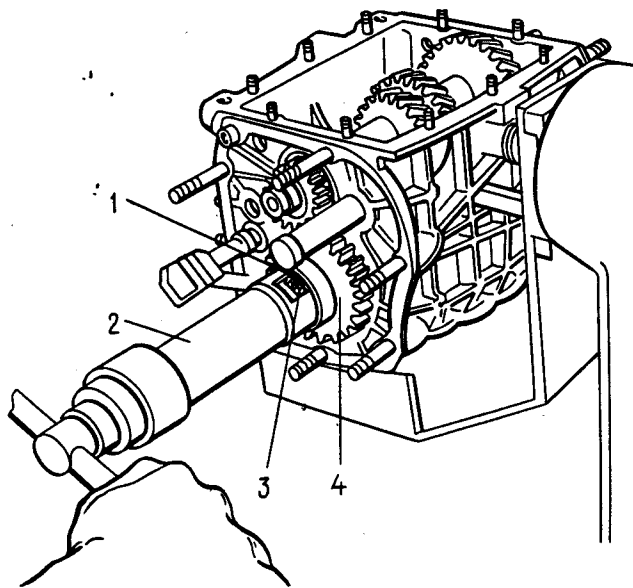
Installing Reverse Gear Lockring on Main Shaft:
